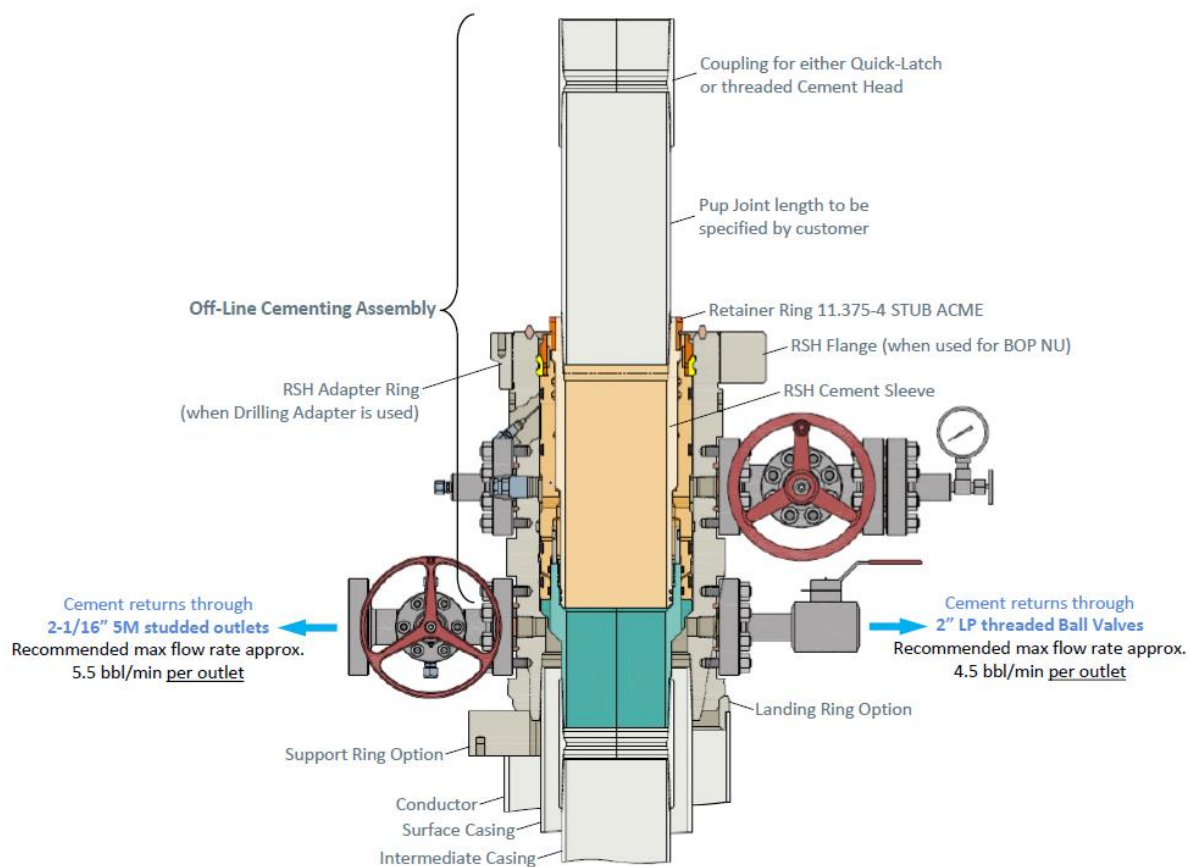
Vault 9 5/8" 5M offline cementing tool. Pressure rating limited by the lesser of 5M tool rating or the 9 5/8" pup joint and casing.
